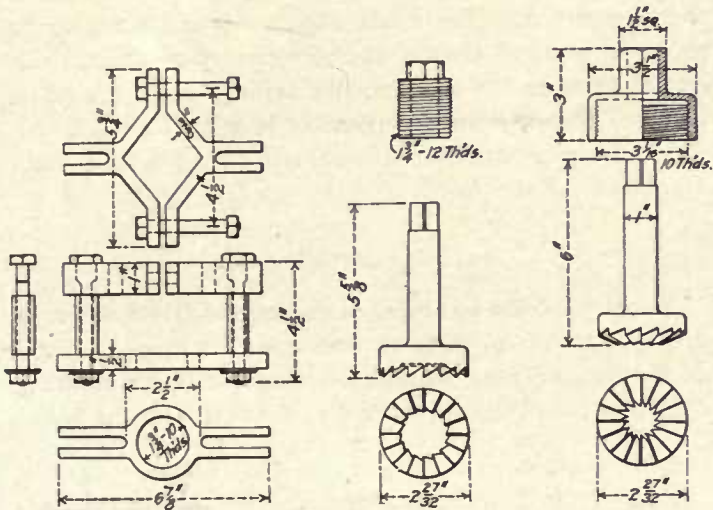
Details of Check and Branch Pipe Joint Reamer.
